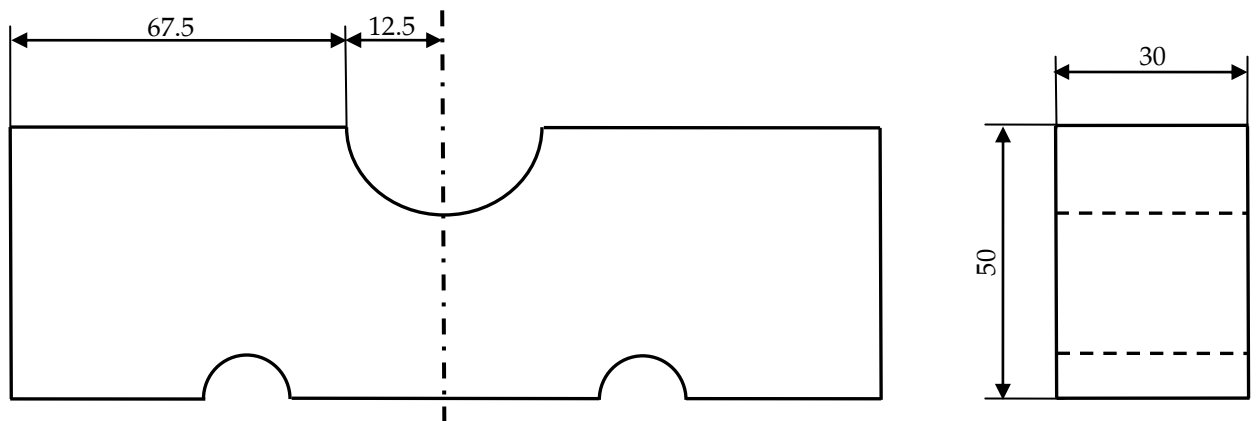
Technical drawing of the loading beam with all dimensions in mm.
